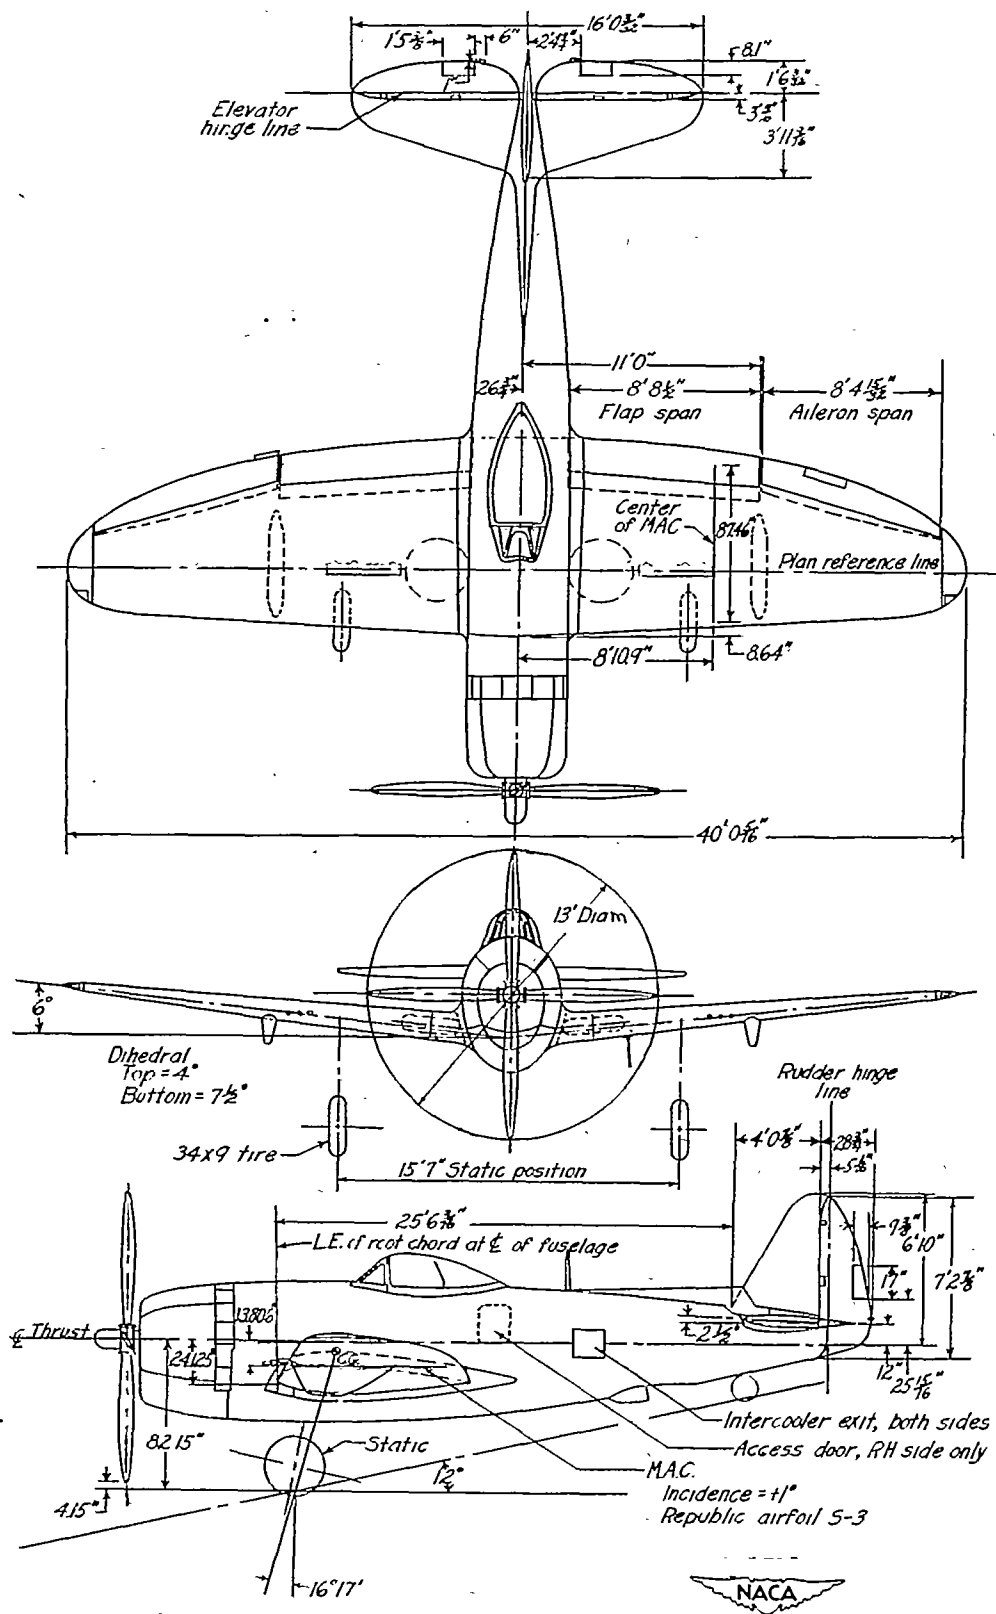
Three-view drawing of the F-47D-30 airplane.
